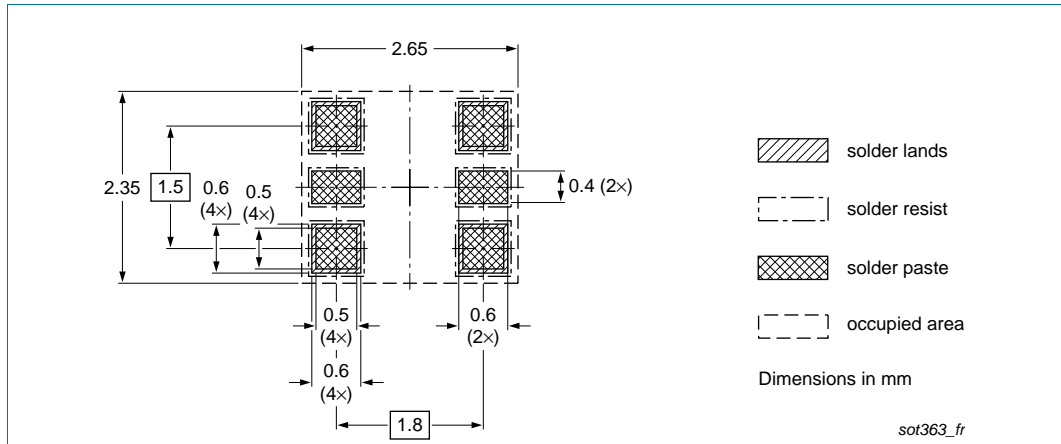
Reflow soldering footprint BAV70S (SOT363/SC-88)
